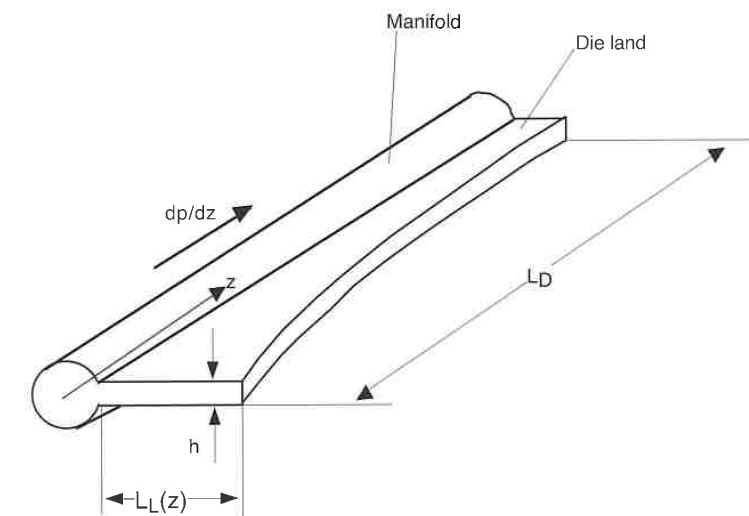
End-fed sheeting die coordinates and dimensions.
